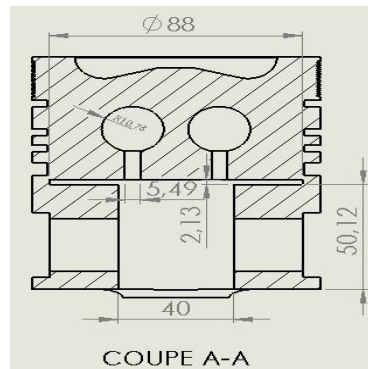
Cross-sectional view A-A displaying the intelligent dimensions of the component.
